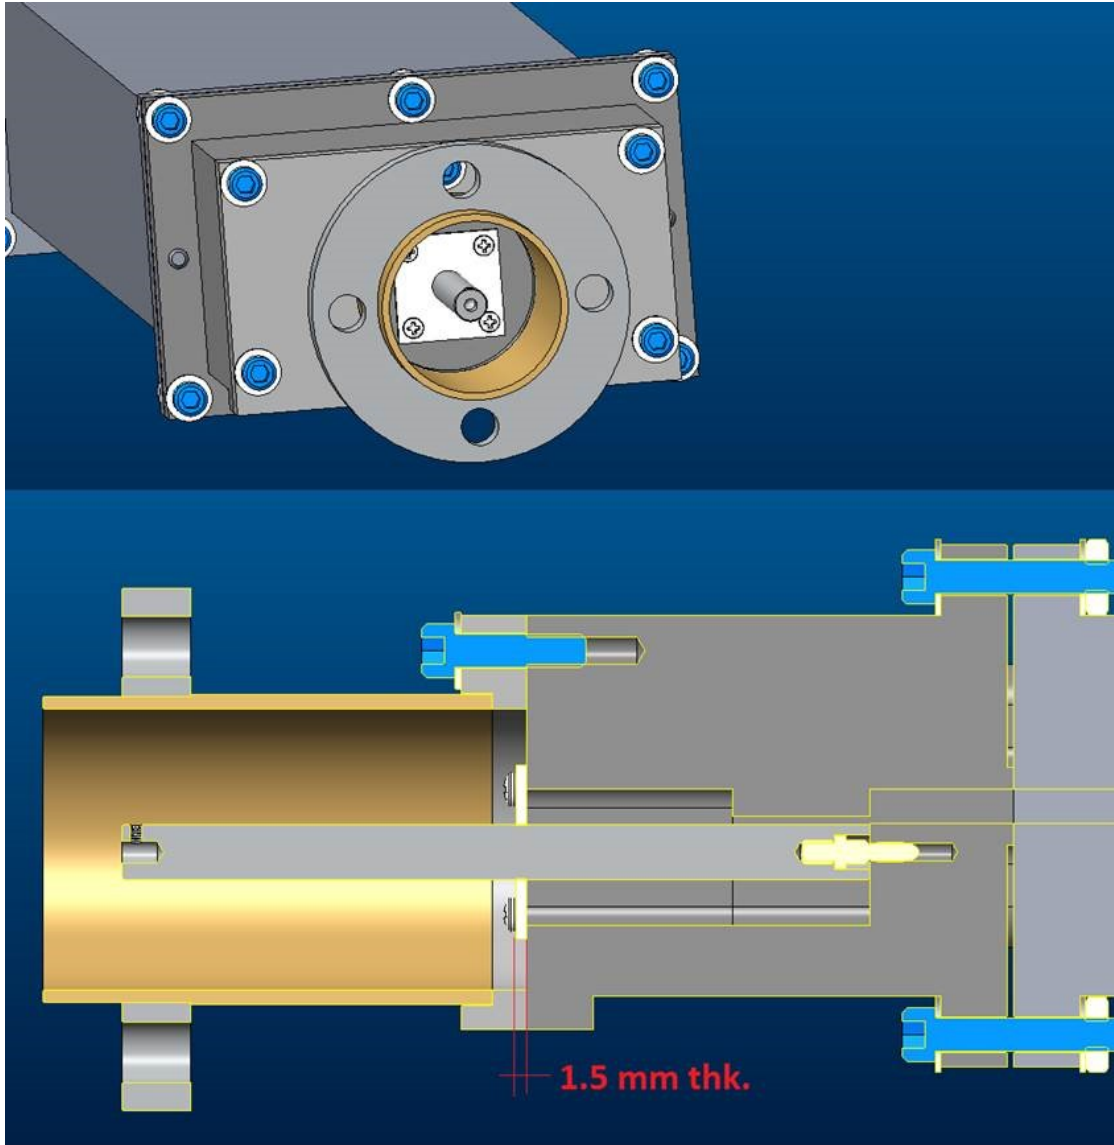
HOM coupler assembly looking into the cavity side flange (top). Cross sectional view of the antenna assembly attached to the cavity side of the HOM coupler. A 1.5mm thick teflon RF window is used as a support bracket for the antenna (bottom).
